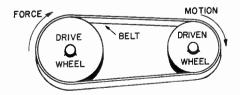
When a belt instead of an idler wheel is used, the drive wheel and the driven wheel rotate in the same direction.
